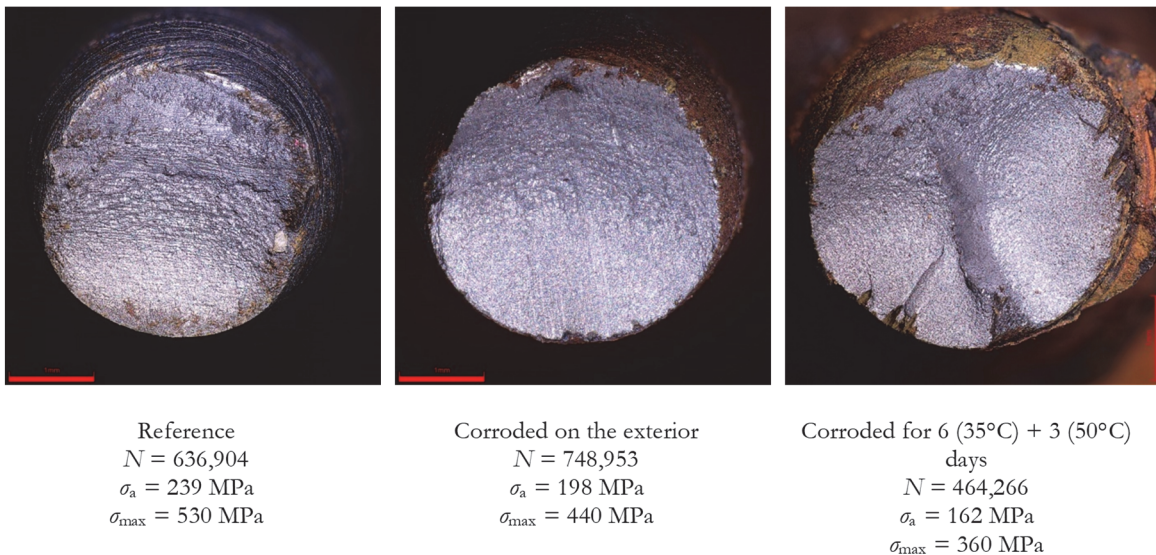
A set of photographs of fracture surfaces of steel specimens for the region of approximately 600,000 cycles.
